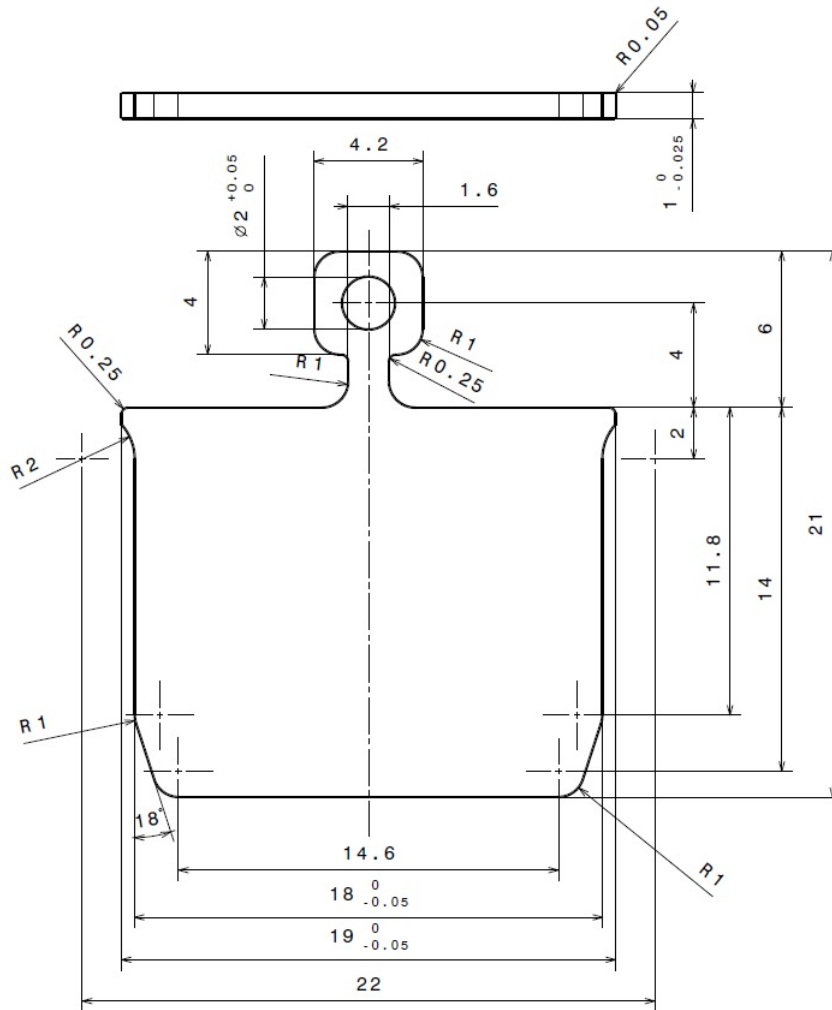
The drawing of commercially available molybdenum flag type holder used in the construction of the new deposition system. Reproduce from [142].
